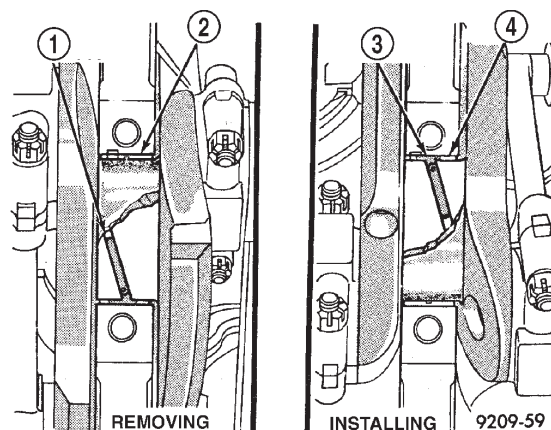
Upper Main Bearing Removal and Installation with Tool C-3059
